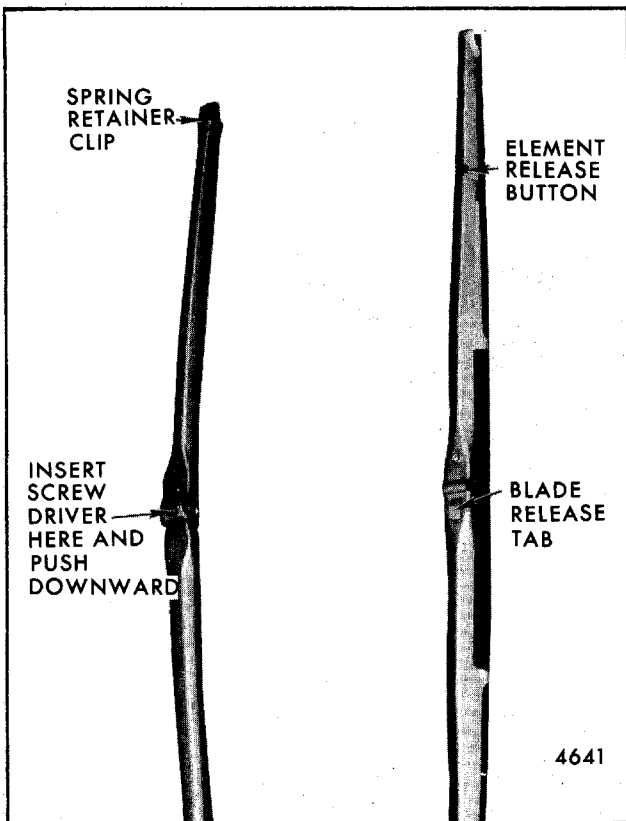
Wiper Blade Assemblies - "F, H, X" Styles
